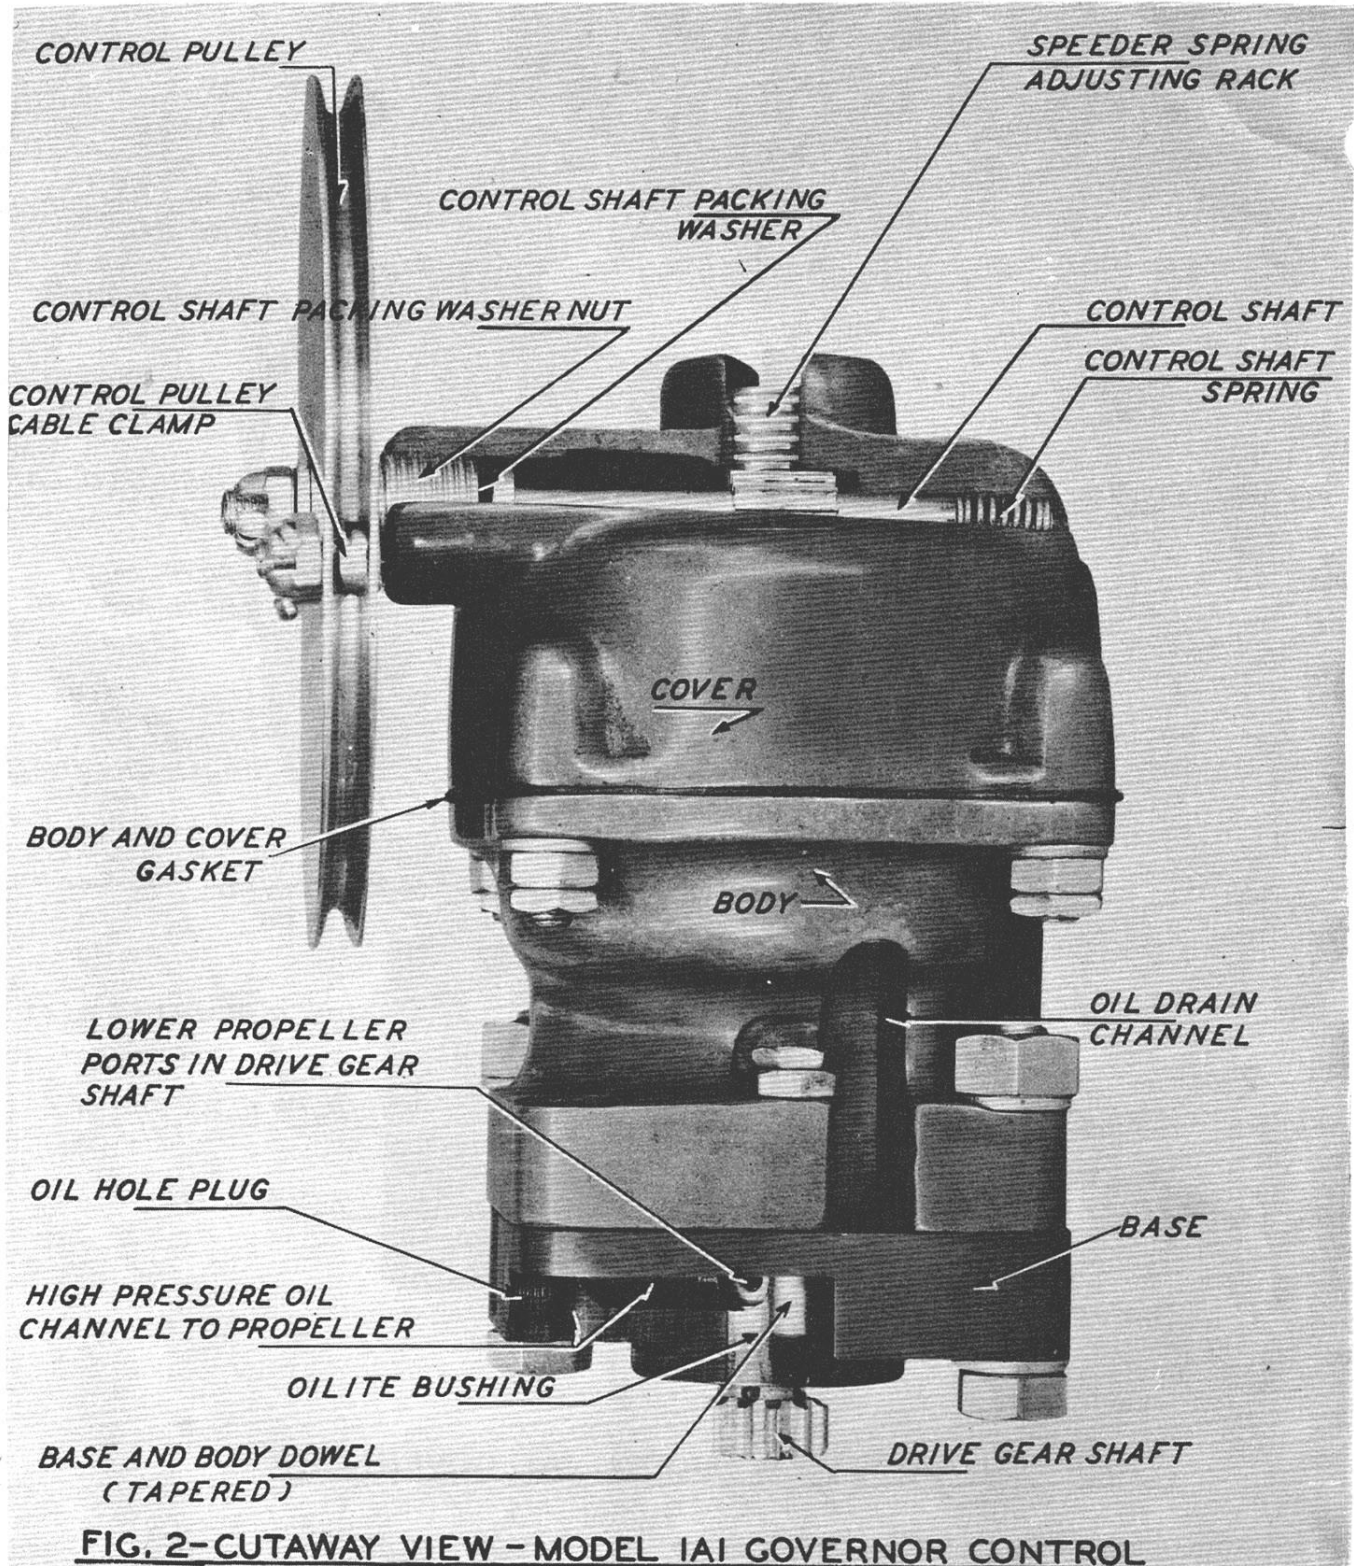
CUTAWAY VIEW - MODEL 1A1 GOVERNOR
